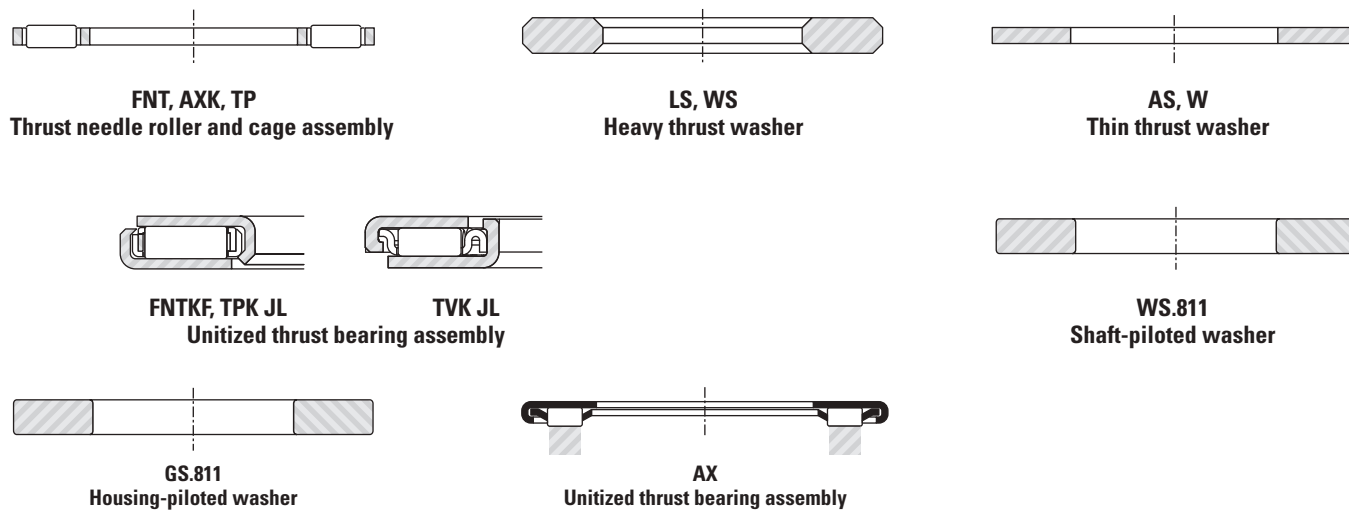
Types of metric series thrust needle roller and cage assemblies and thrust washers
